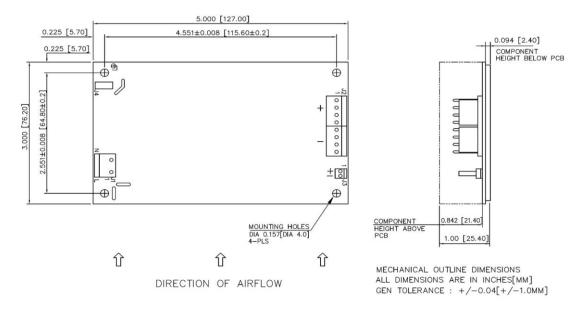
Mechanical Drawing - Molex Header (Option 2)
